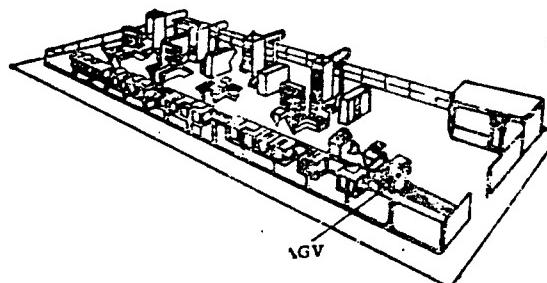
ZHS-FMS03 Limited-Scale FMS (Designed by DMMTI, developed by Qinghai Machine Tool Plant No. 1)
